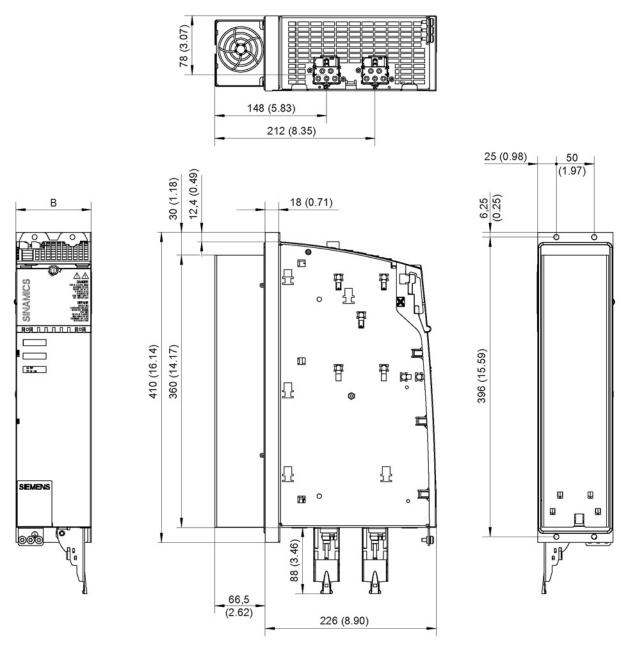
Dimension drawing of 30 A and 2 x 18 A Motor Modules Booksize with external air cooling, all dimensions in mm and (inches); example: 2 x 18 A Double Motor Module
